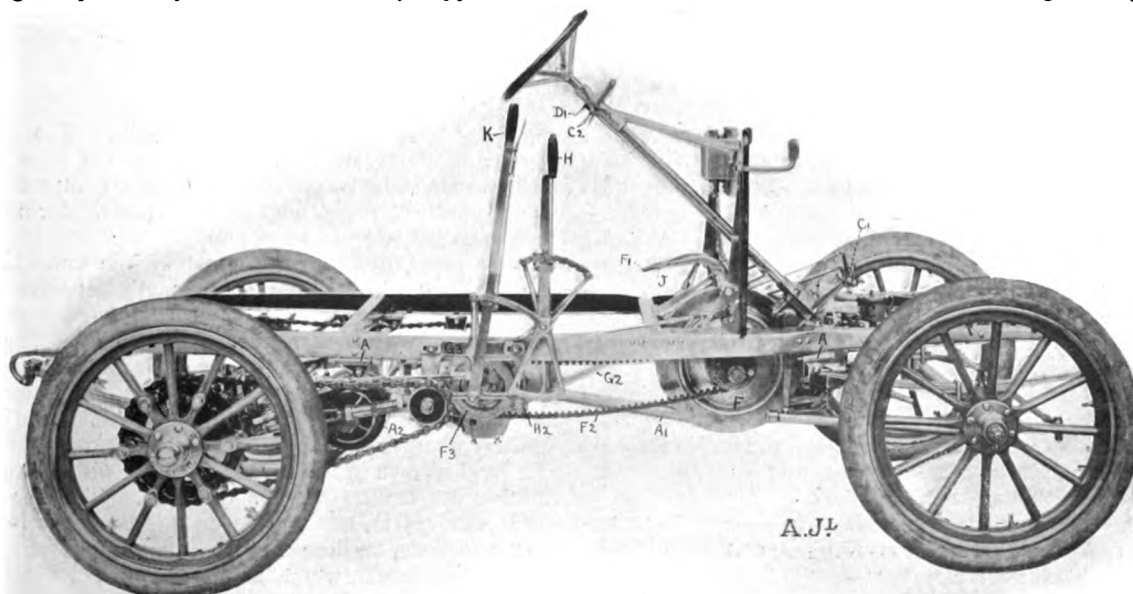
Side view of the 8-h.p. Wolseley Chassis, fitted complete with its 32 by 3½ in. pneumatic tyres.
